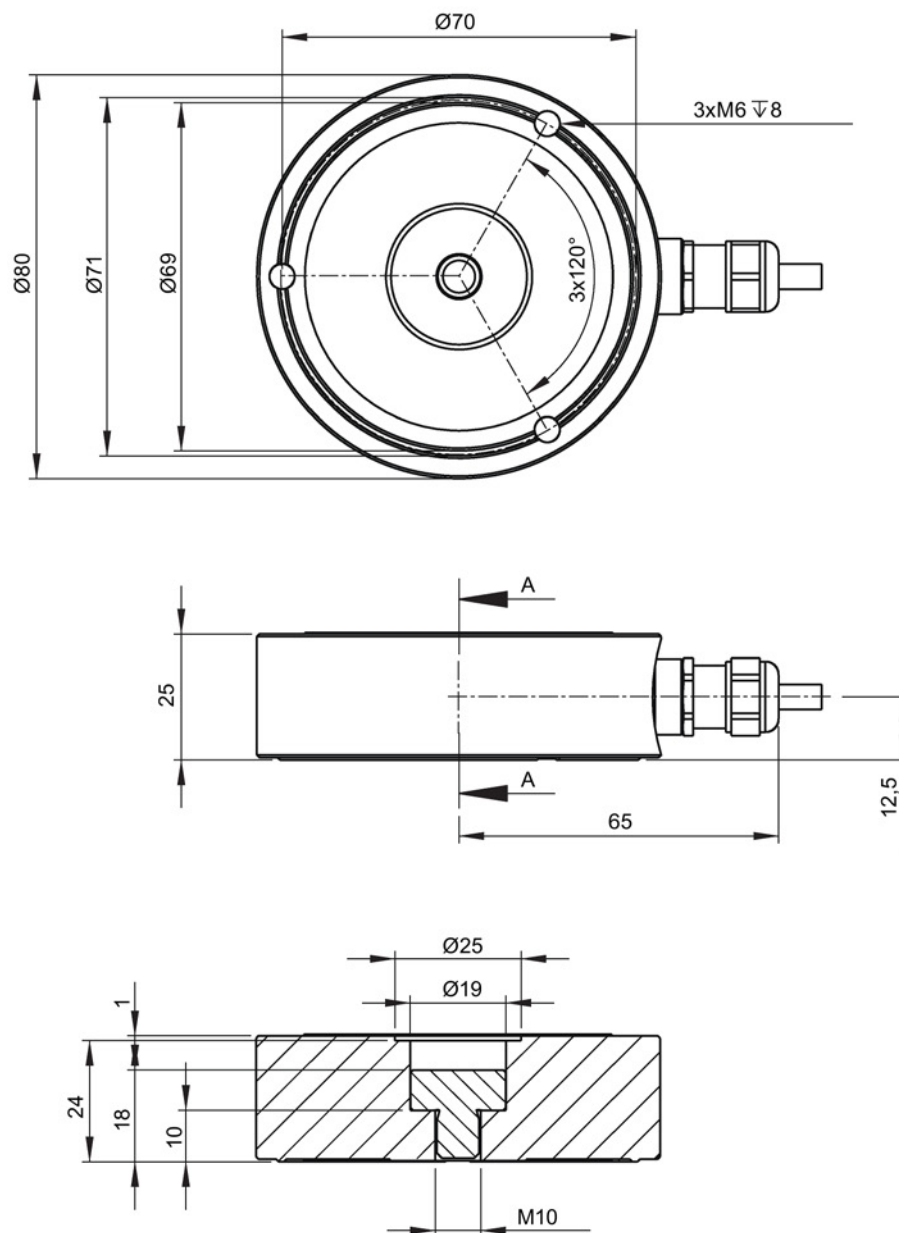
Dimension drawing for SIWAREX WL280 RN-S SA, rated load 0.5 t, 1 t
